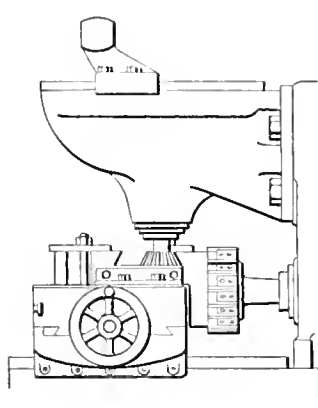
Machine using Vertical and Horizontal Spindles Simultaneously.
